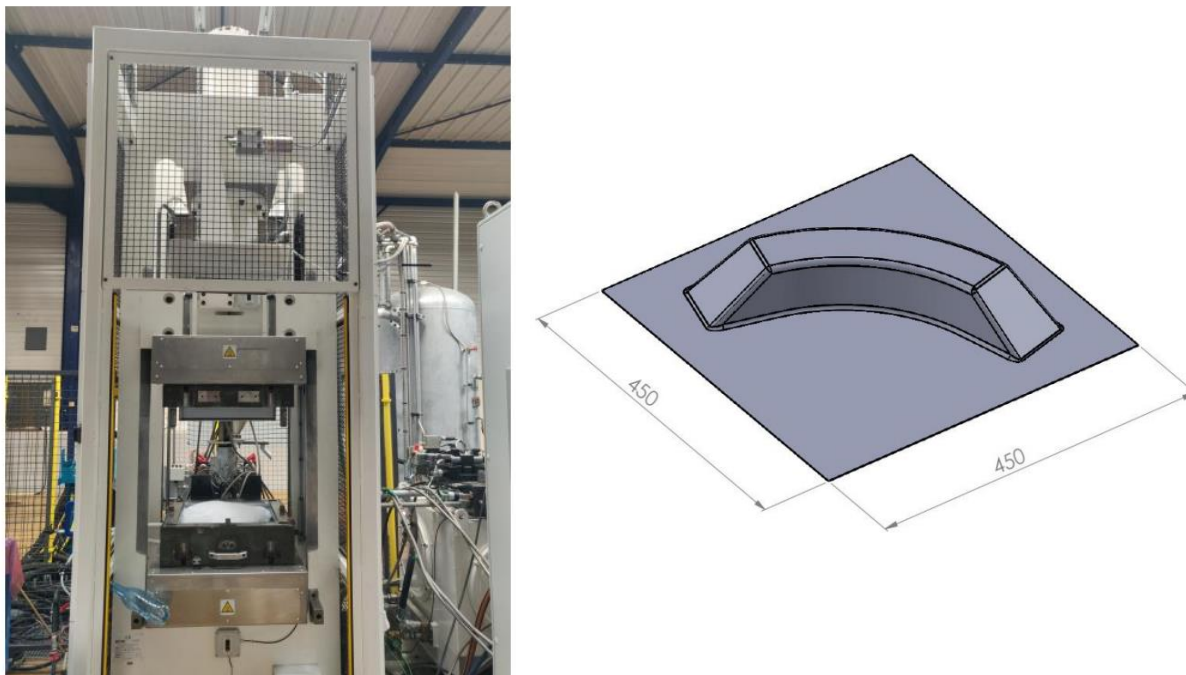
Hydraulic press used for compression moulding (left); CAD image of mold geometry and dimensions (right)
